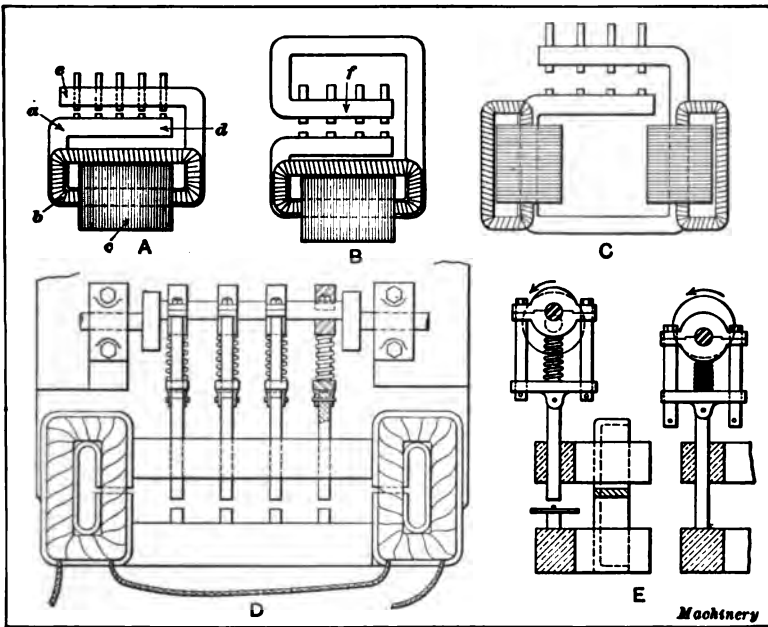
Diagram illustrating Principle of Machine employing Three Electrodes for Welding Pins to Sheet Steel — Compensation is made for Variation in Length of Pins
